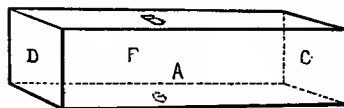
Picture of Perspective Drawing of a Rectangular Block
